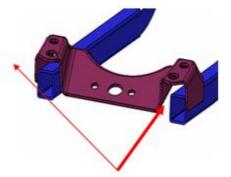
Bracket mounted on chassis by manse of 8 mm overlap where adhesive and MIG weld are possible and called hybrid joint
